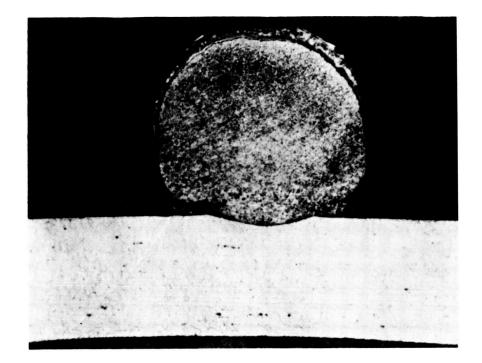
Weld joint 1.4. JPL 2; gold plated Dumet wire to Inco ribbon; not sterilized; 150x magnification; Carapella etch (02324).
